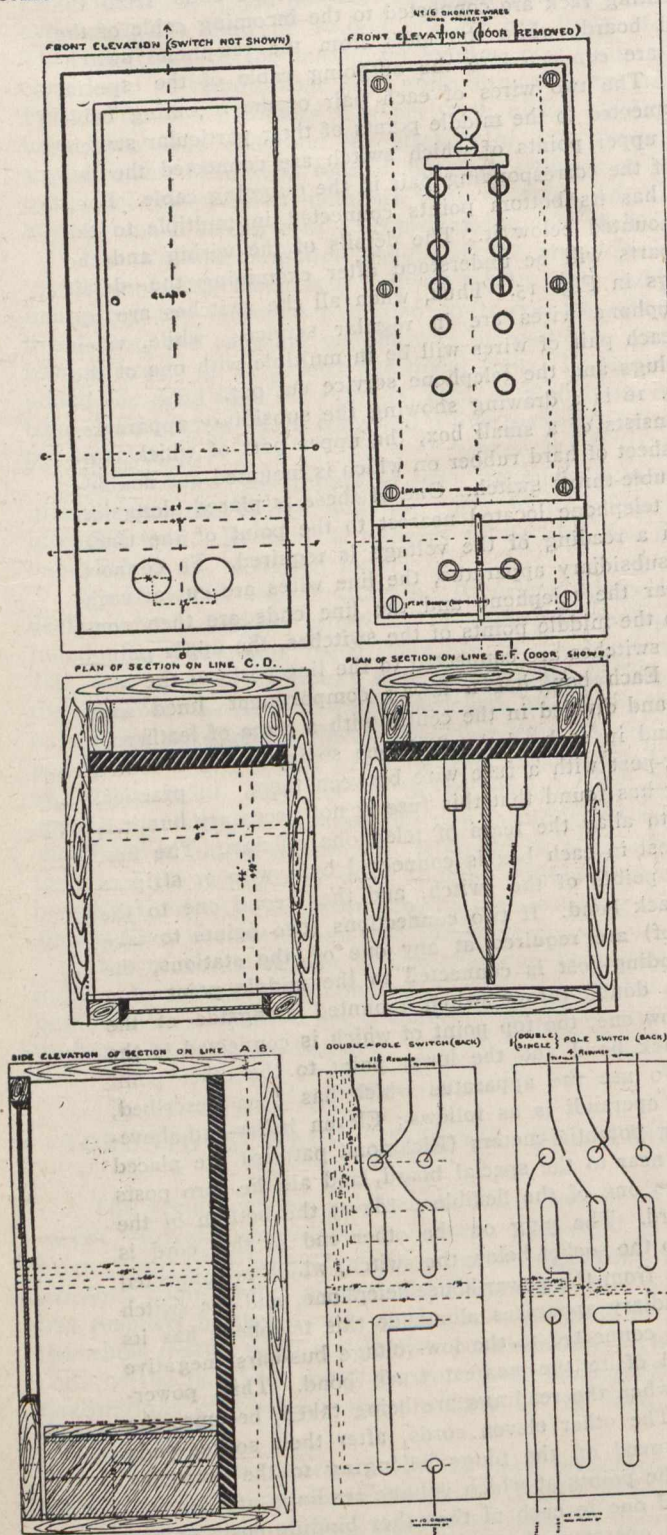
Station Switch and Fuse Boxes, Testing System.
